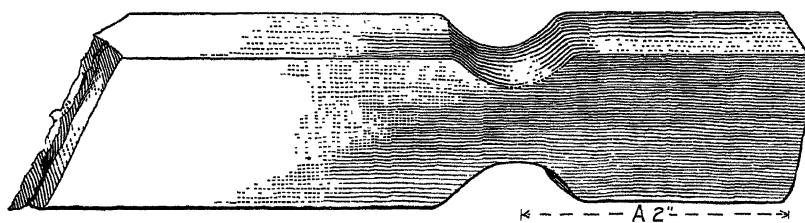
The first stage in making a Wrench—the bar fullered.
